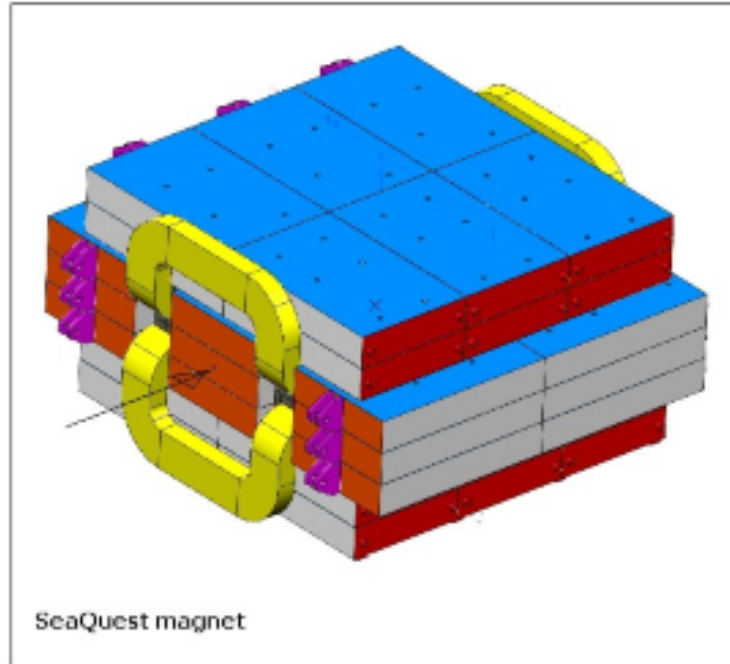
Drawing of FMag illustrating the iron slabs and aluminium coils [77].
